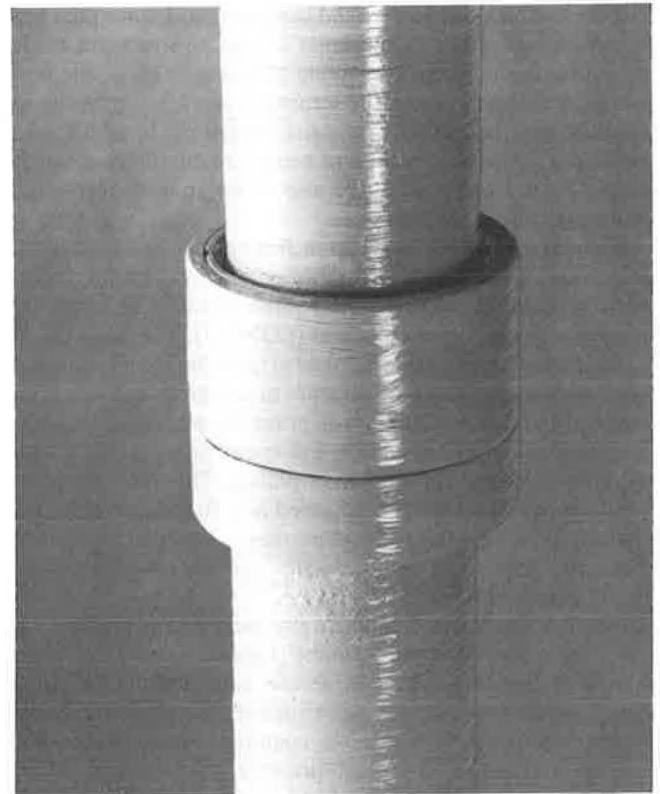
Photograph of a 6-in.-diameter mechanically coupled 3,000 psi pressure pipe.
